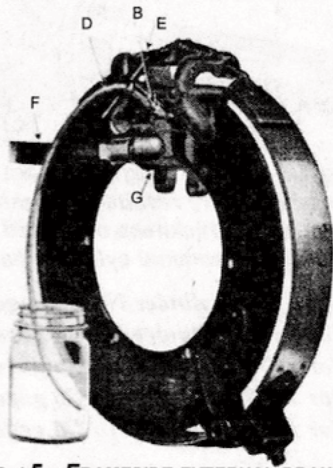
FRAMESIDE EXTERNAL BRAKE SHOWING BLEEDER WRENCH AND HOSE ATTACHED.
